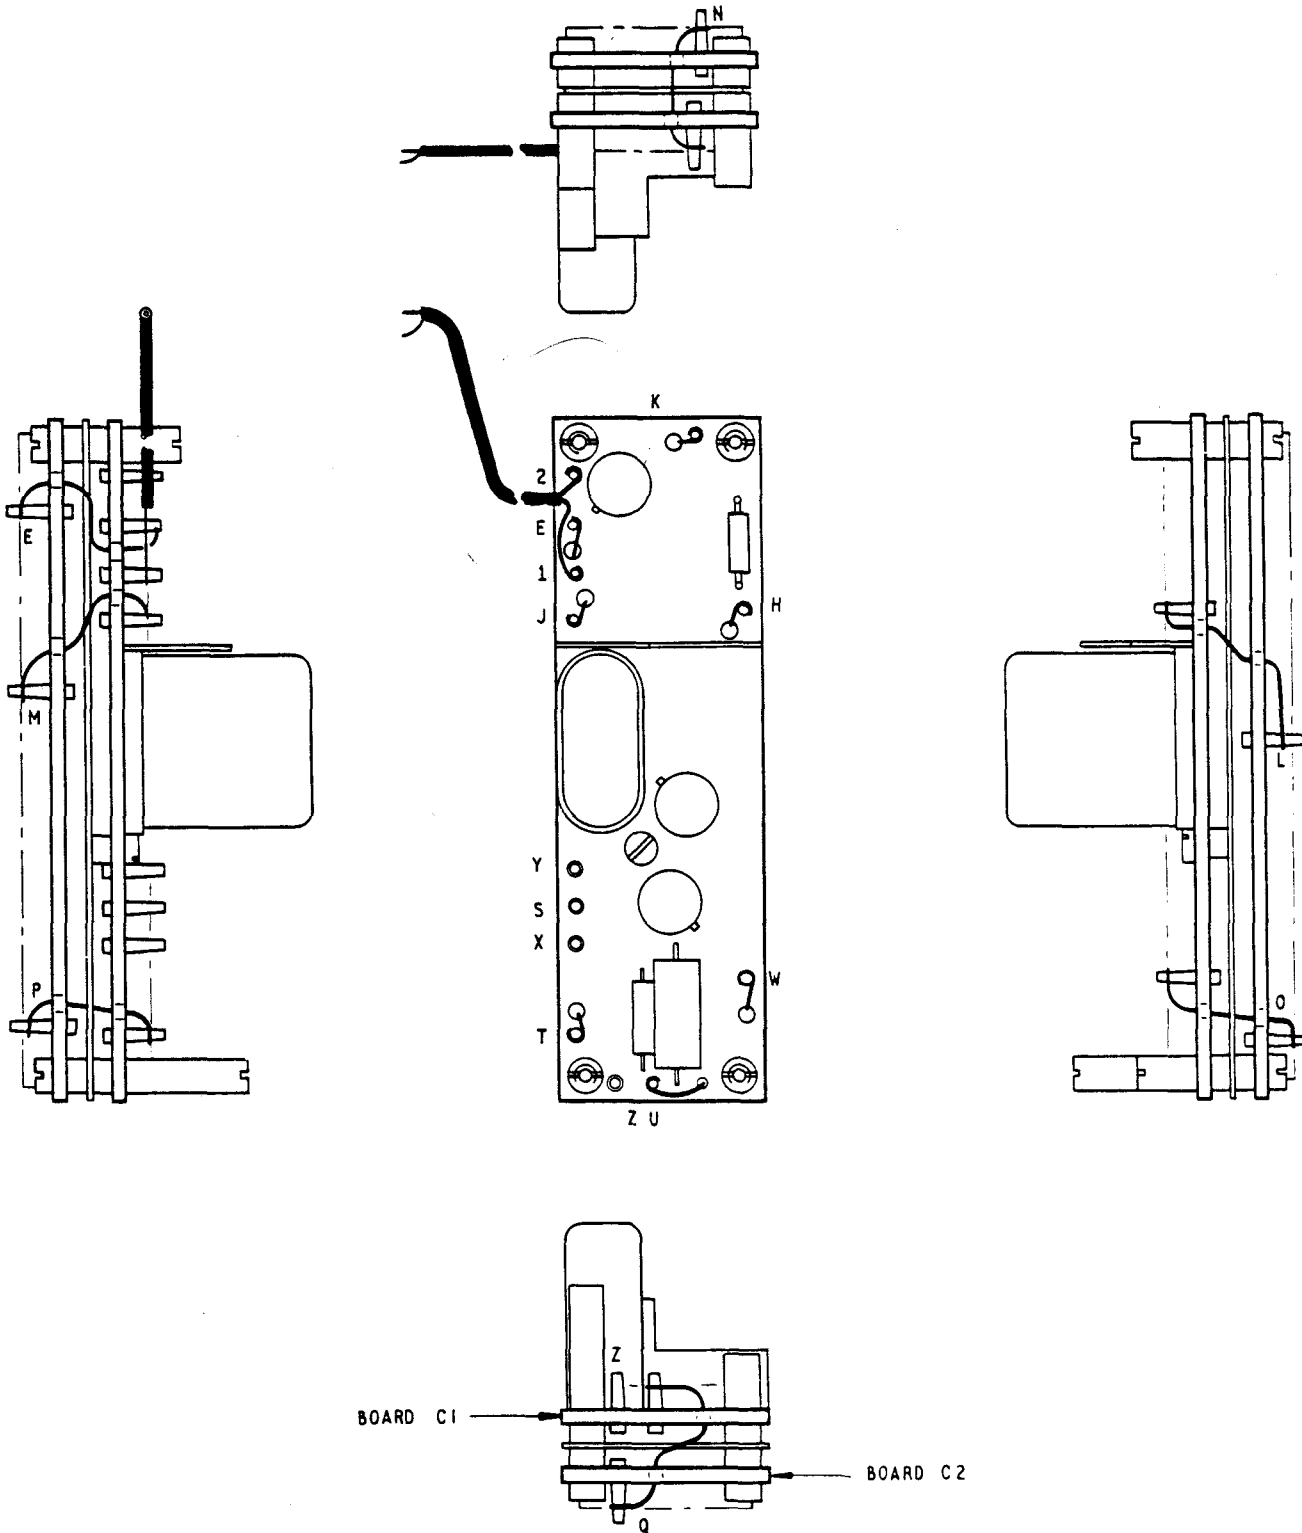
Unit C, i.f. assembly, interboard wiring
